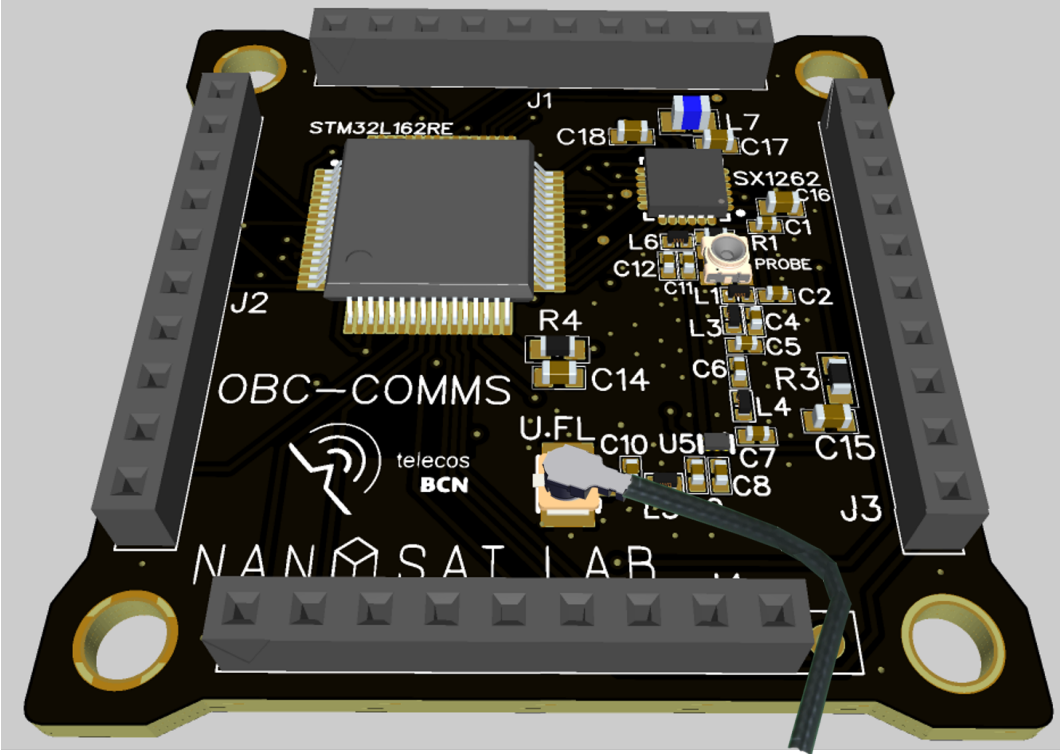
3D model of the OBC-COMMS PCB with the coaxial cable
